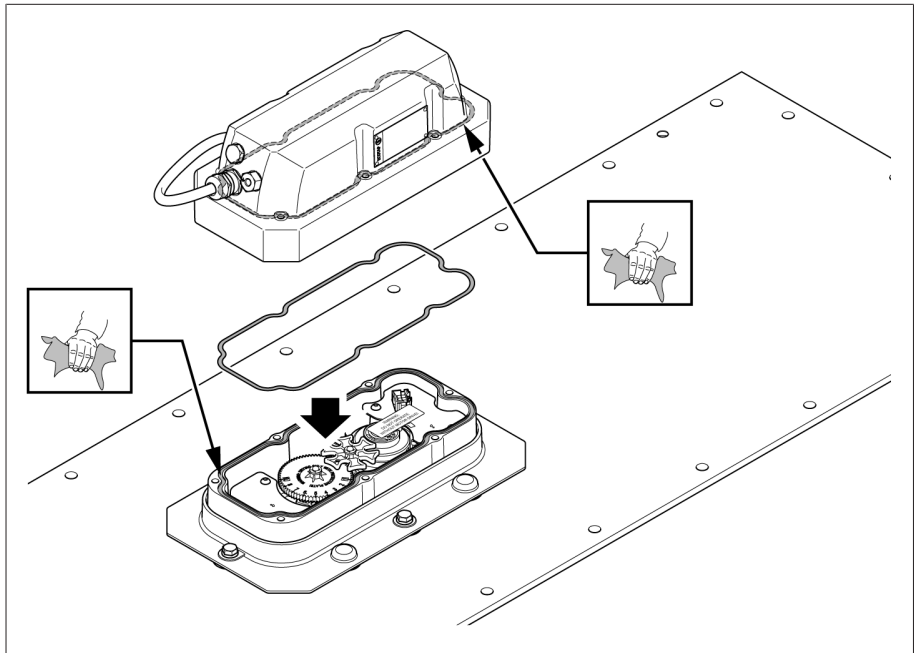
Cleaning the sealing surfaces of the motor-drive unit
